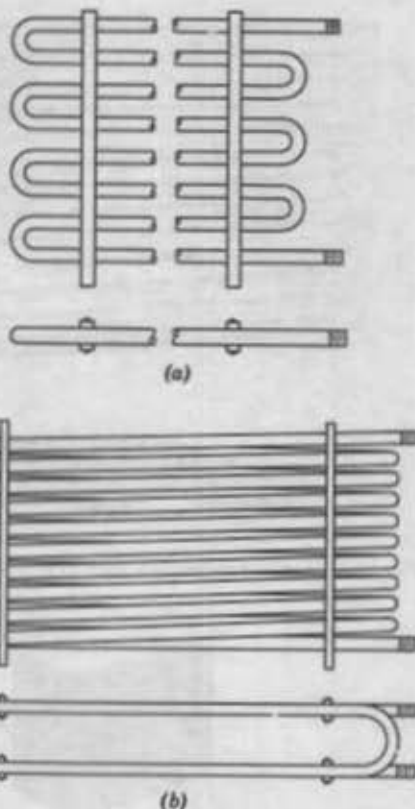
Common designs for bare-tube coils. (a) Flat zigzag coil. (b) Oval trombone coil.
